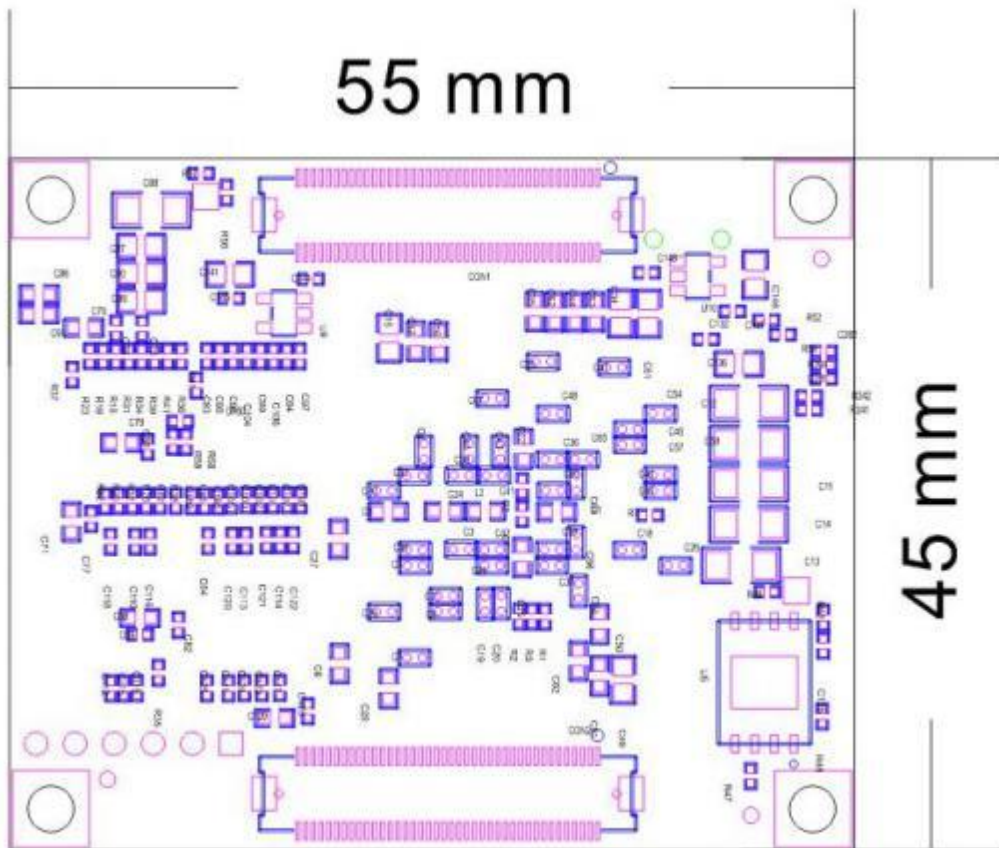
AC7050B FPGA Core board (Bottom view)
